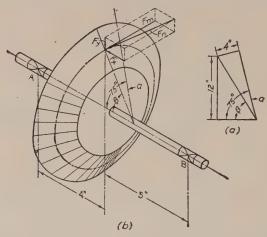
Forces Acting on Straight-Tooth Bevel Gear.
